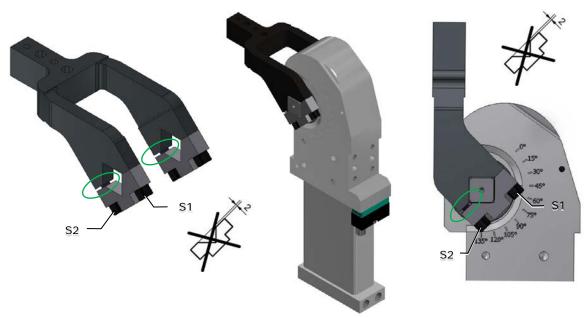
Example of assembling clamping arm versions 1 and 2
